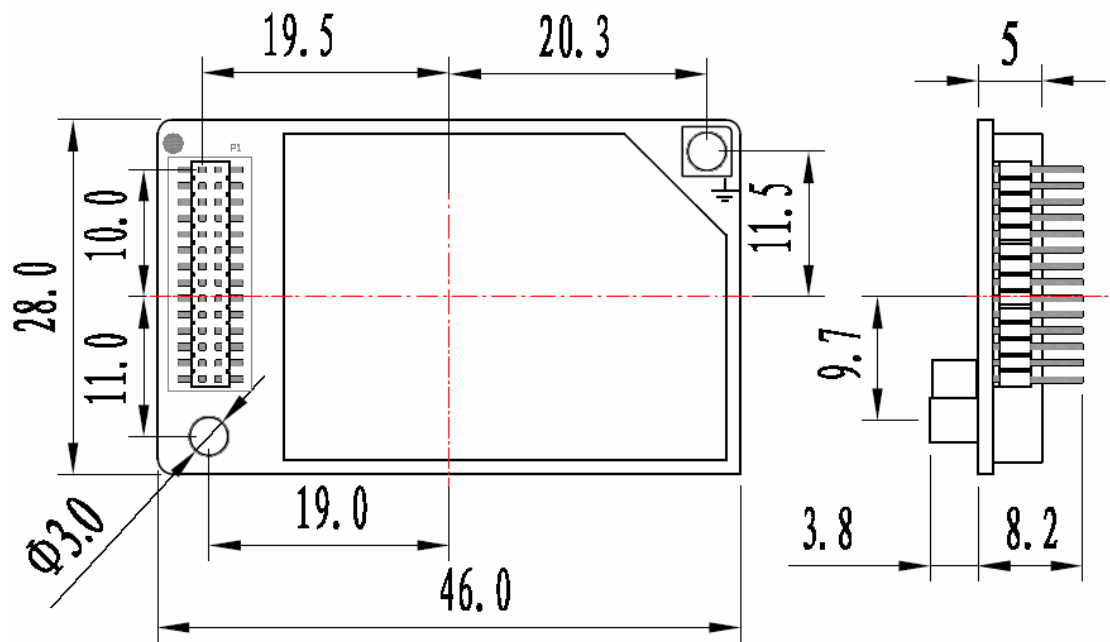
HT-MDL-Z-EM-2400-101-X Outline Drawing
